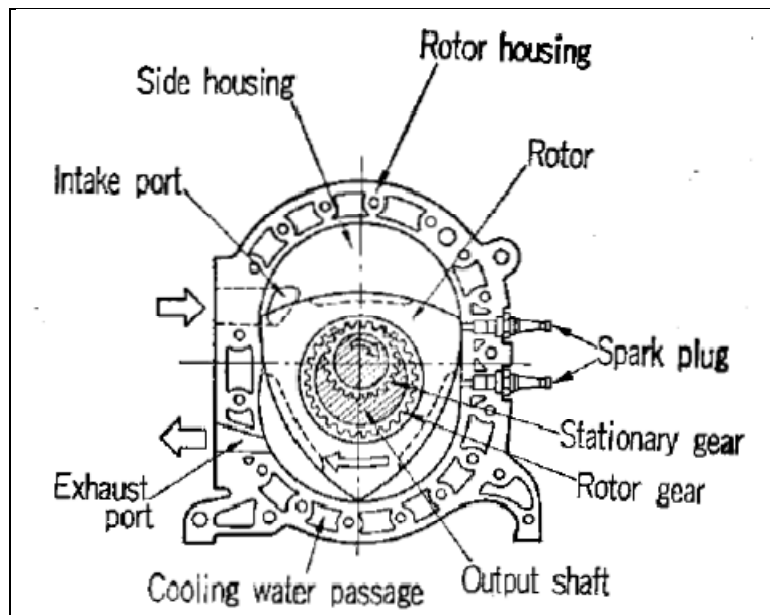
A rotary engine showing the three-flank rotor, trochoid housing, and crankshaft (19).
